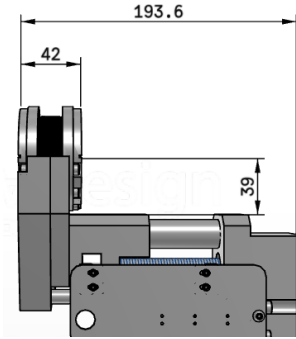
Compressed Linear Mechanism CLSM38-50-SS. Dimensions in mm.
